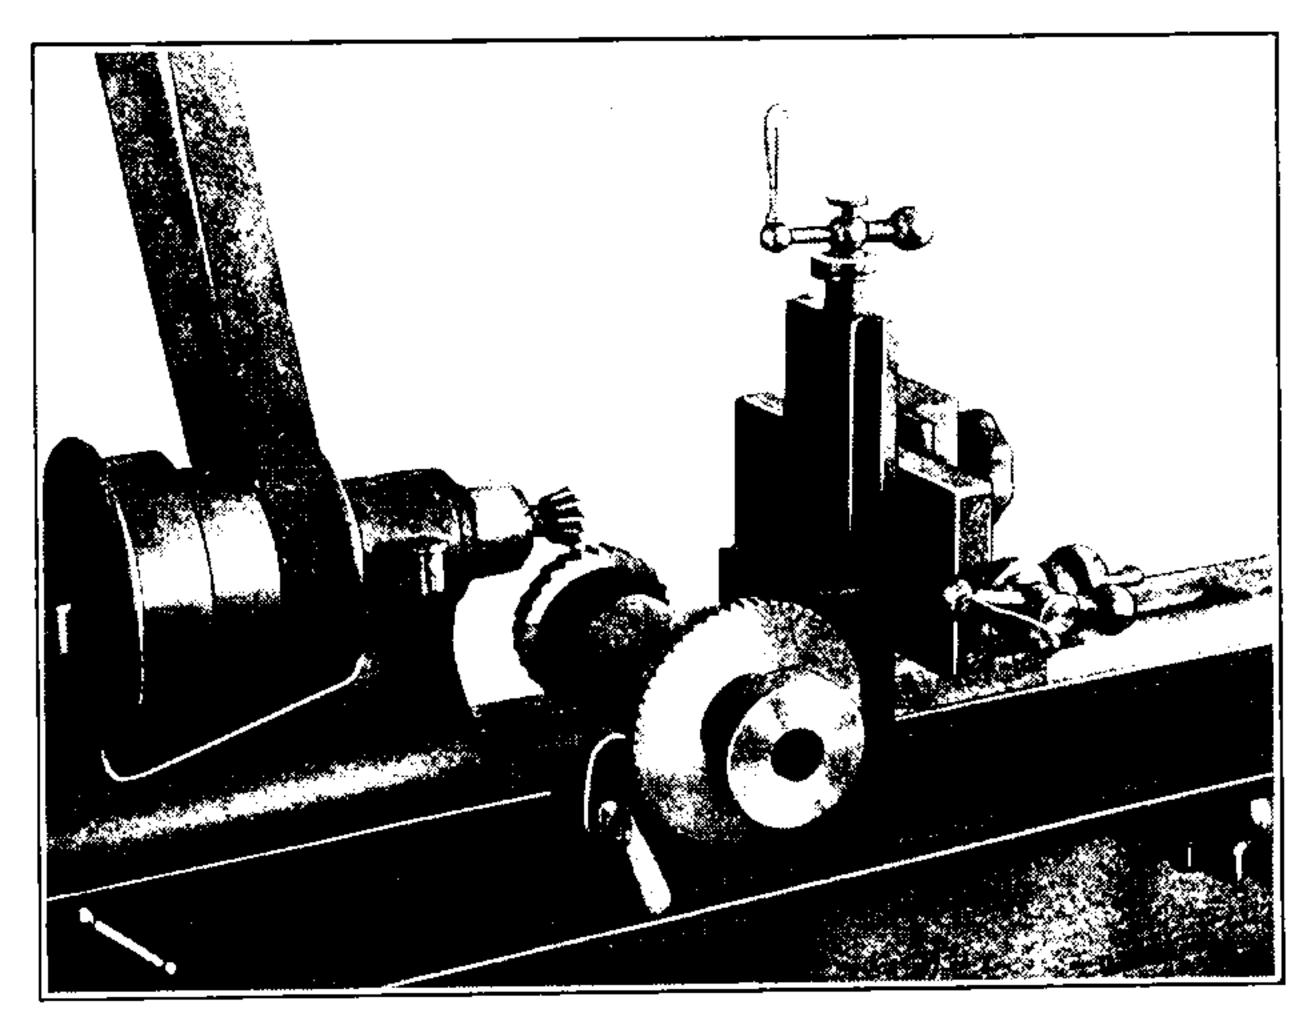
Head end view of Milling Attachment set to mill teeth in a Milling Cutter
